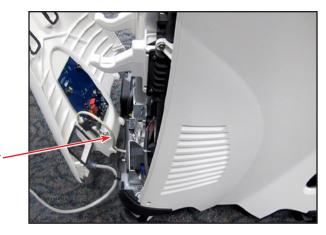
Cable W147 connecting Footswitch Charging PCB to MFIO PCBA
